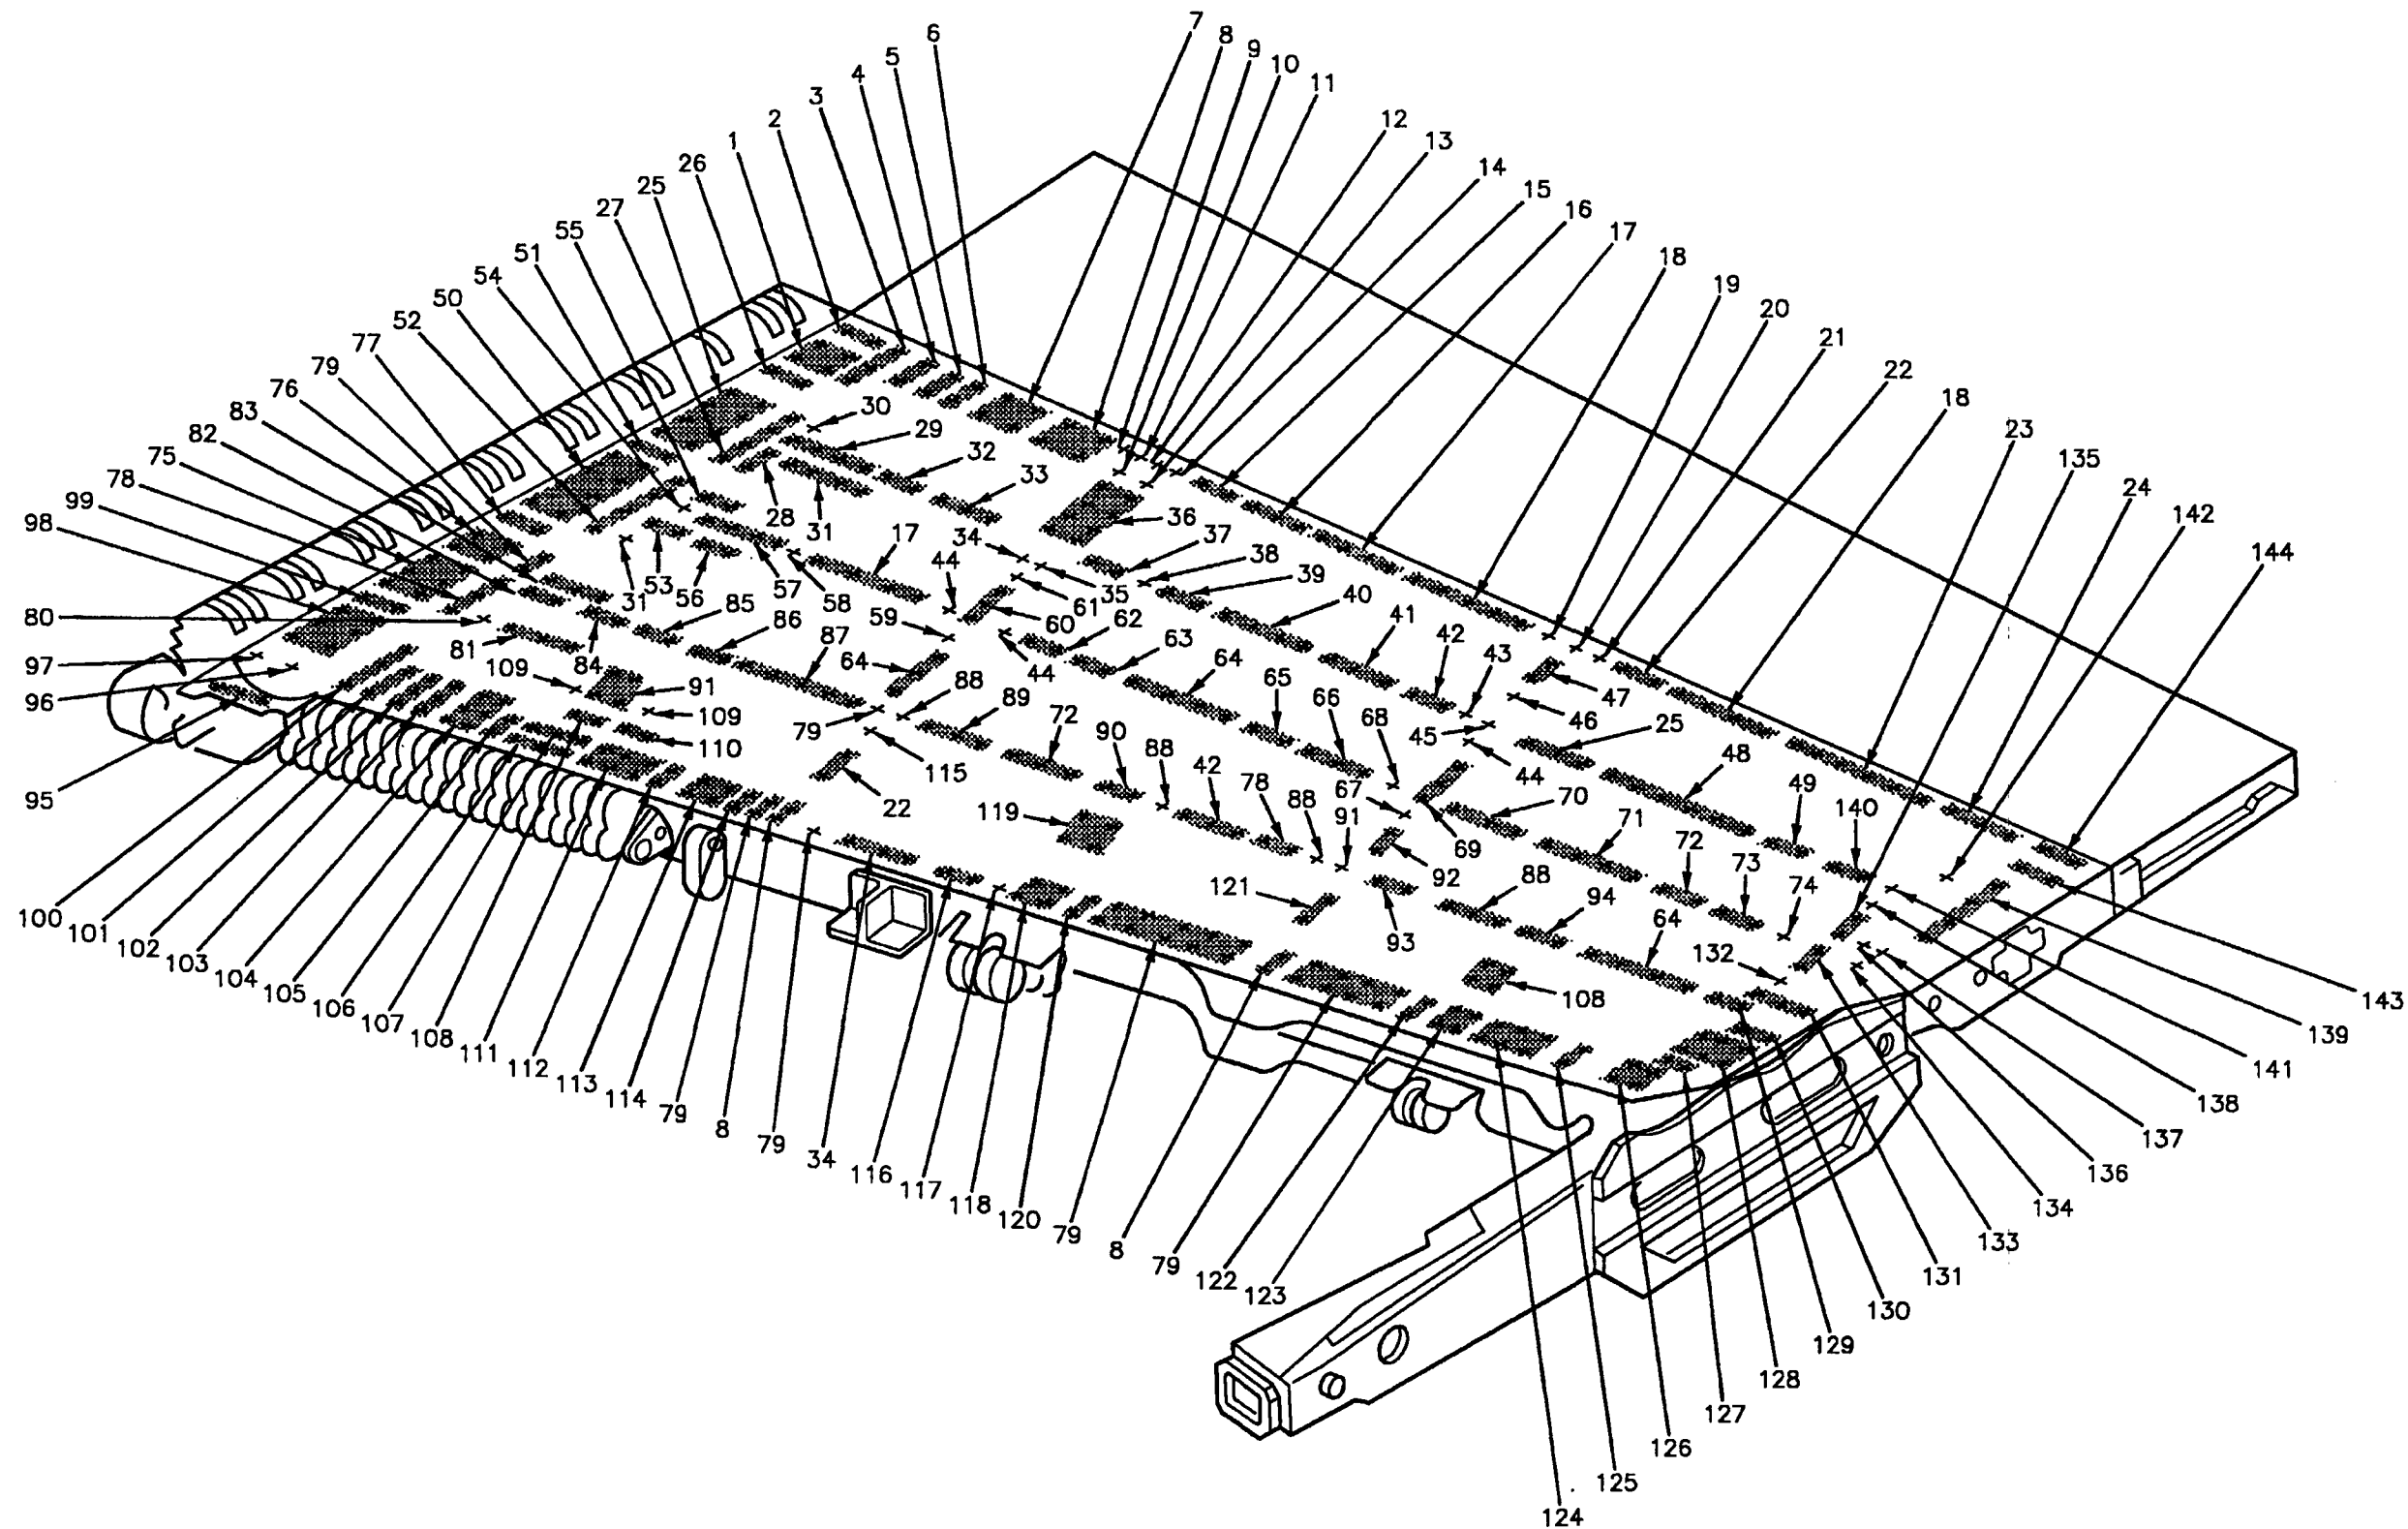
Outer Wing Upper Skin Fasteners (Sheet 1)
